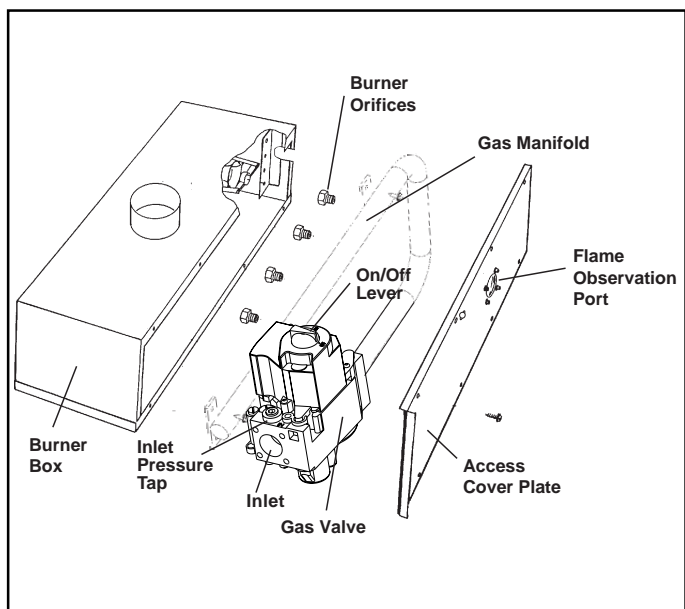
Typical Installation For Sealed Burner Box With Access Cover Plate
